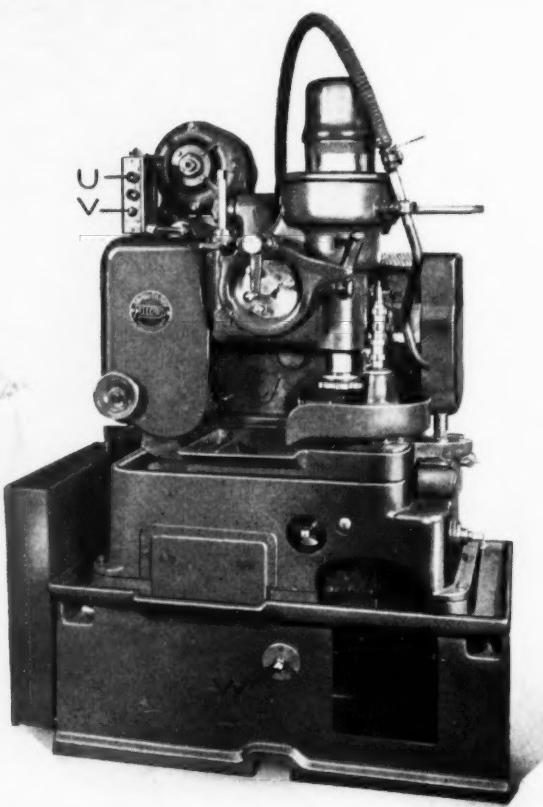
Fellows High-speed Gear Shaper Equipped for Generating in One Operation All the Cams on Diesel-engine Fuel-injection Pump Camshafts
